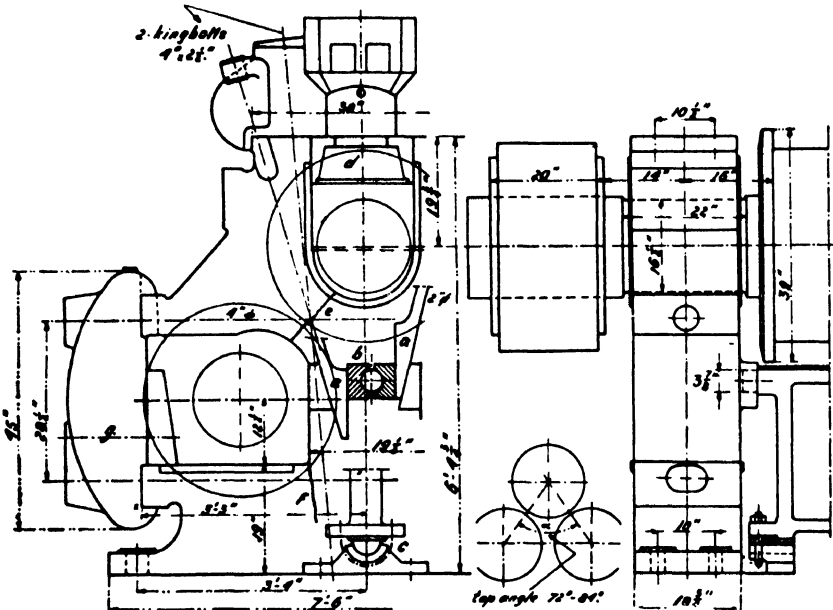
Cast Iron Mill Housing 34 ft. \times 72 ft.
